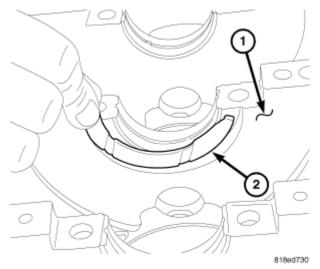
INSTALLING THRUST BEARING Courtesy of CHRYSLER LLC
